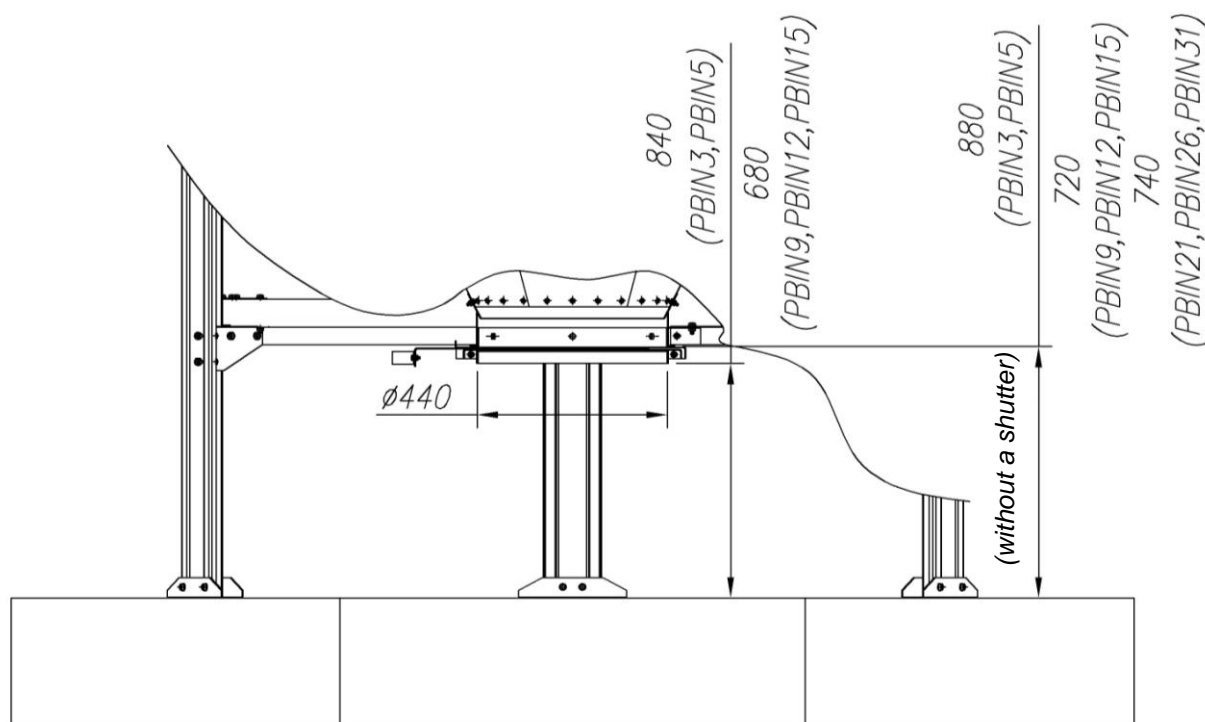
A diagram showing the outlet opening with a shutter together with conditions and options for connecting loading equipment.
